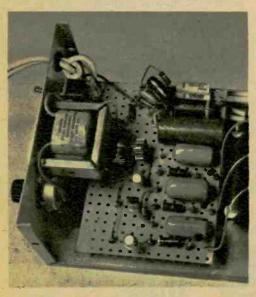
Photo shows layout of parts on perforated circuit board. Much wiring on author's board is on back, although we show it on top in Fig. 2.
